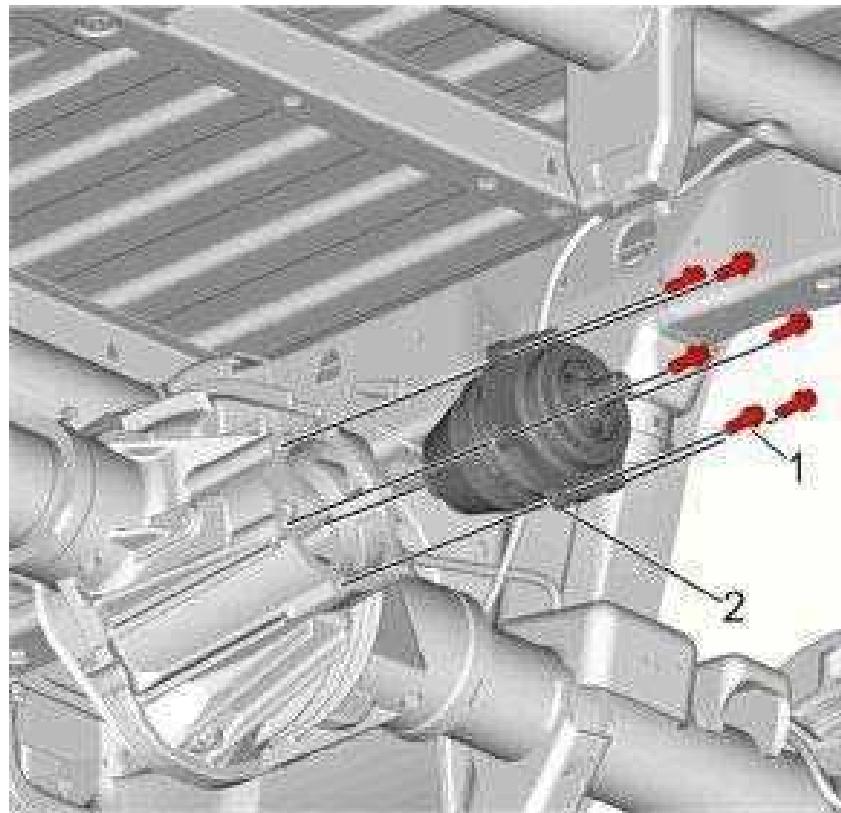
Differential Drive Pinion Gear Bearing Retainer Bolts
